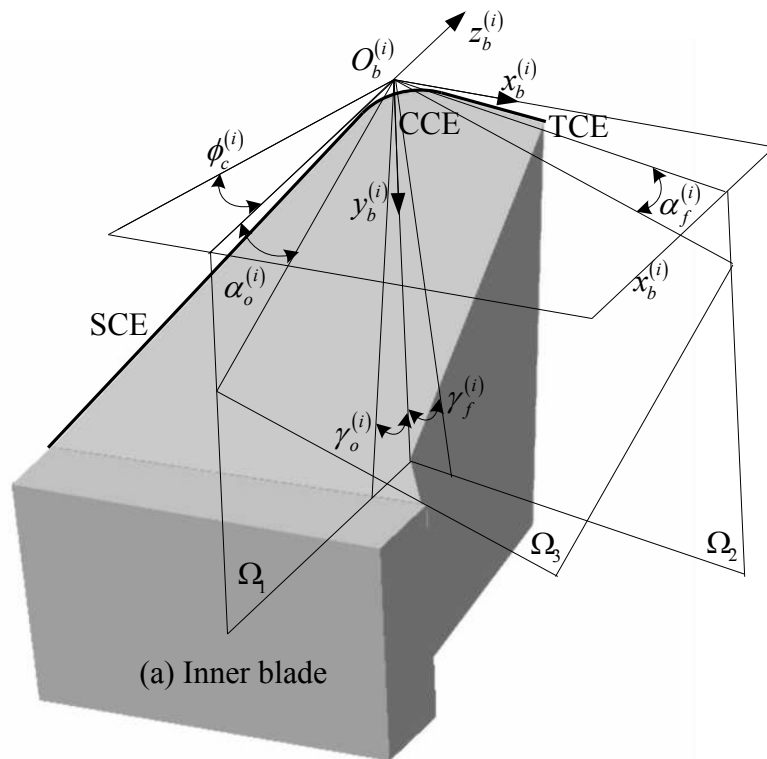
Real blade for face-milled spiral bevel and hypoid gears.
